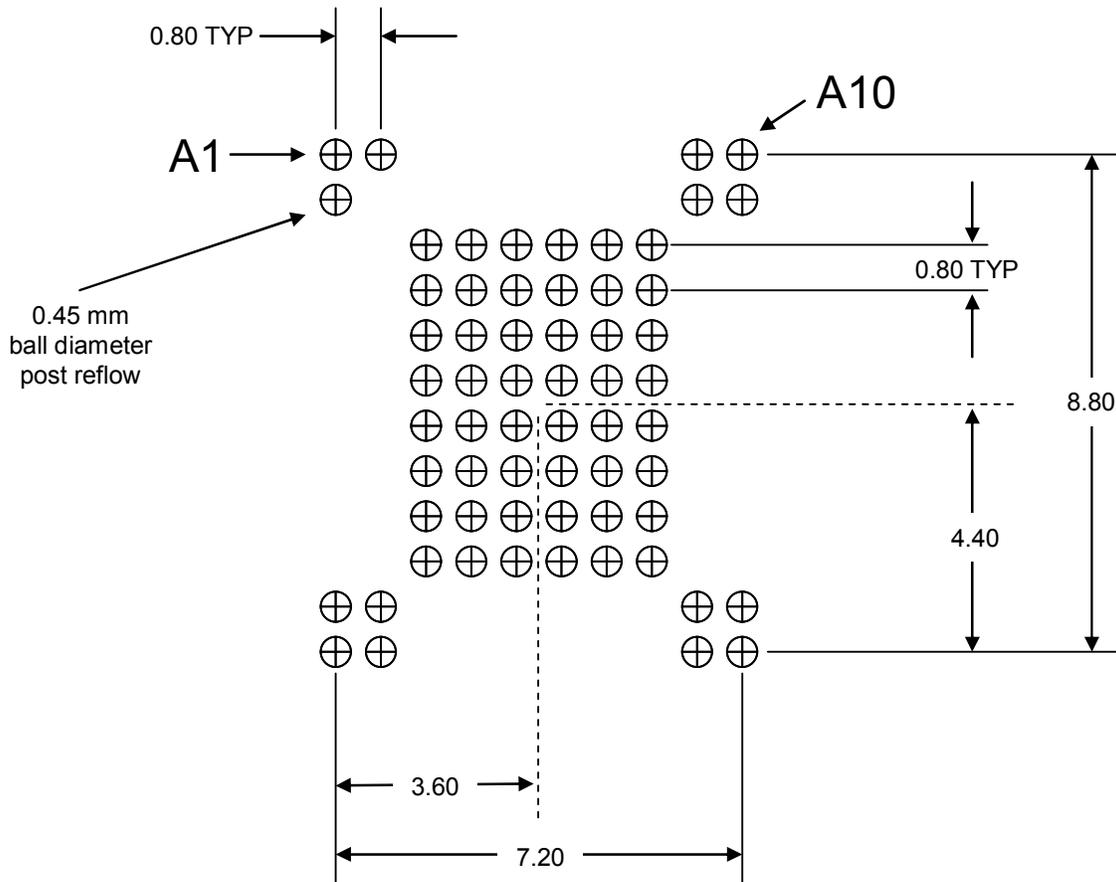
BGA-63 ball spacing requirements (top view, dimensions in millimeters)
